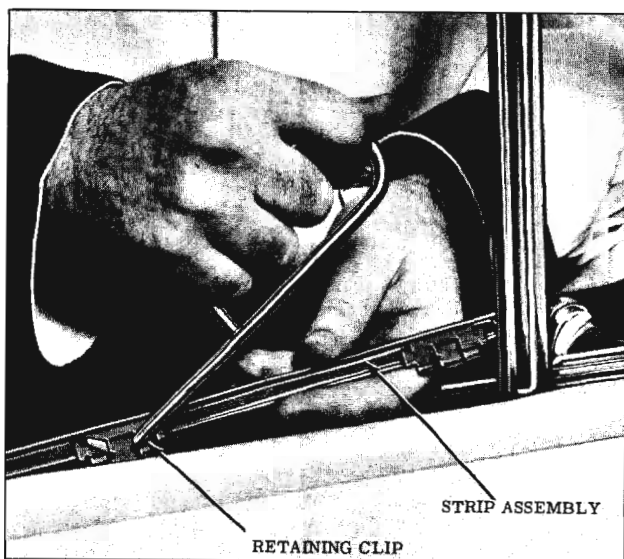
Door Window Glass Run Channel Inner and Outer Strip Assemblies (Outer Strip Shown - Inner Typical)
